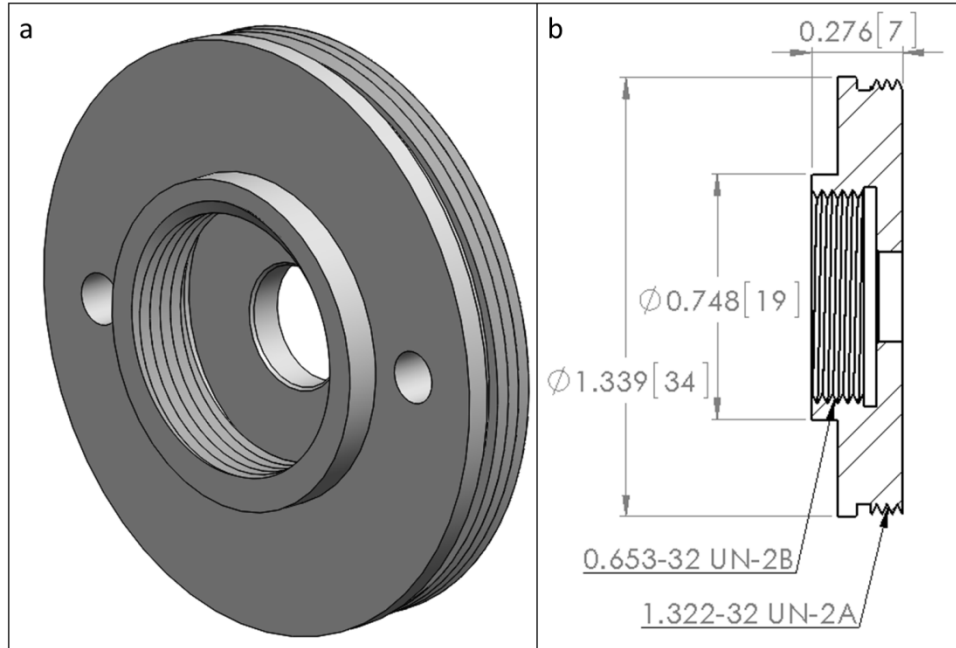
Spin bearing holder (a) and cross section (b). The spin bearing holder screws into one side of the spin enclosure. It supports the spin mass on one side with a pre-loaded radial ball bearing.
